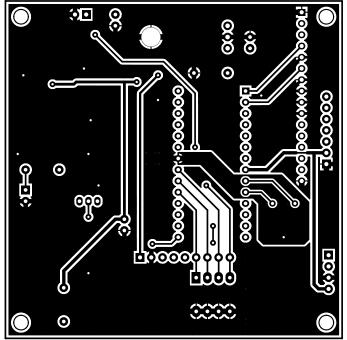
RFID Card Reader PCB Copper Pattern (Top Layer)
